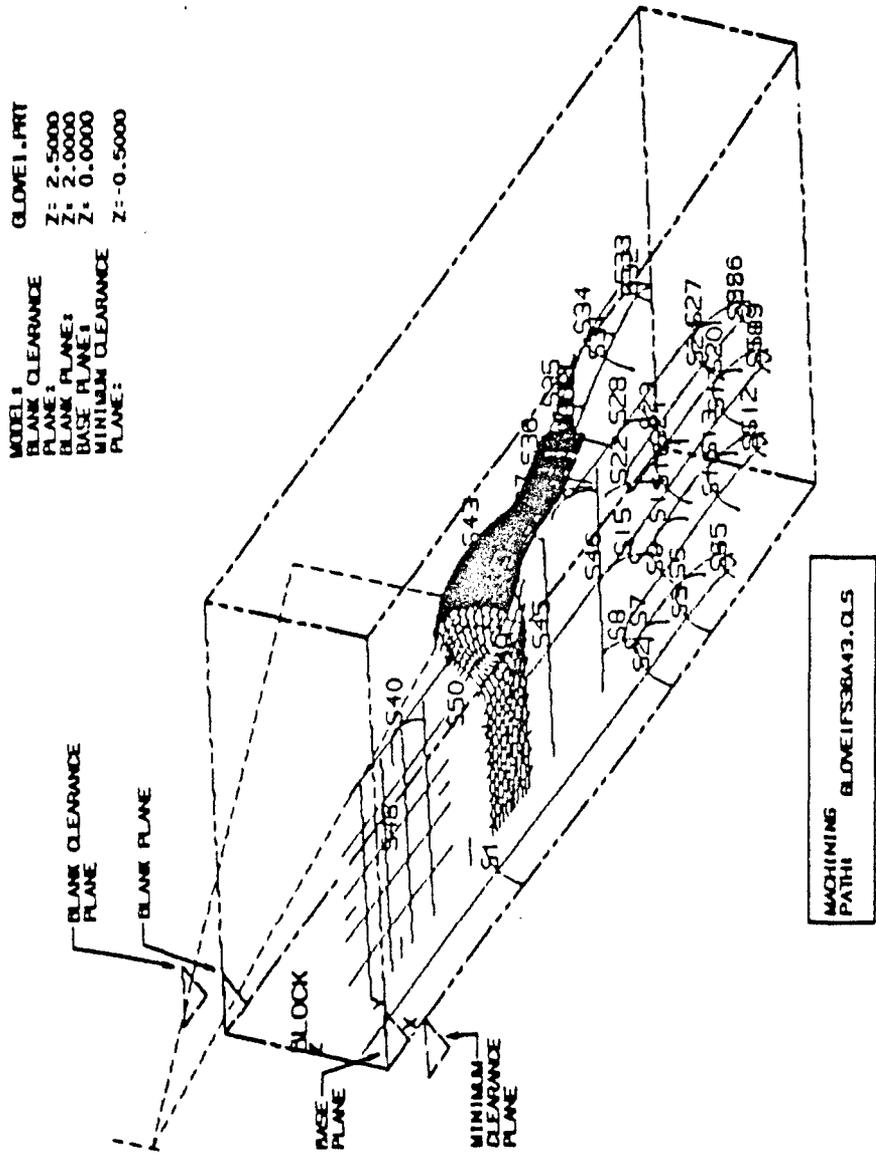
Machining Path: GLOVE1FS36A43.CLS
